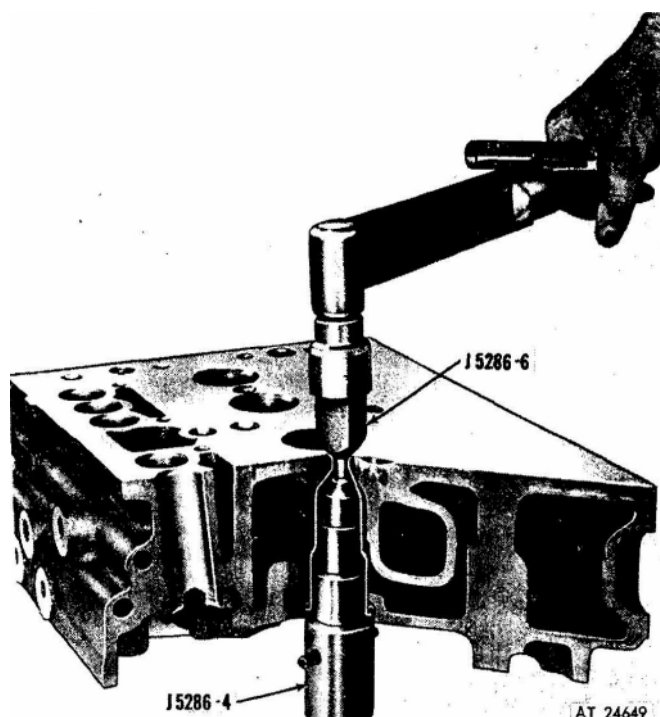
Upsetting injector tube with installer J 5286-4 and Die J 5286-6.
